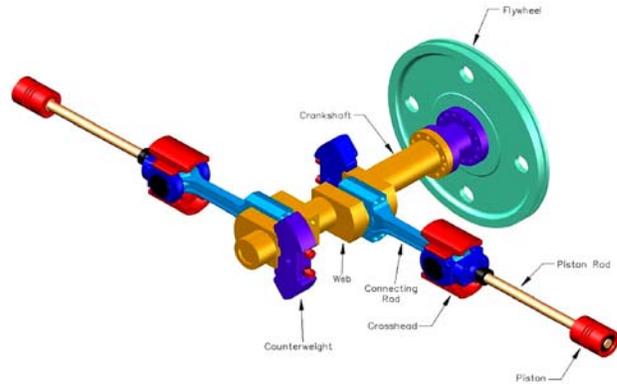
Rotating and Reciprocating Components of Two-Throw Compressor.
